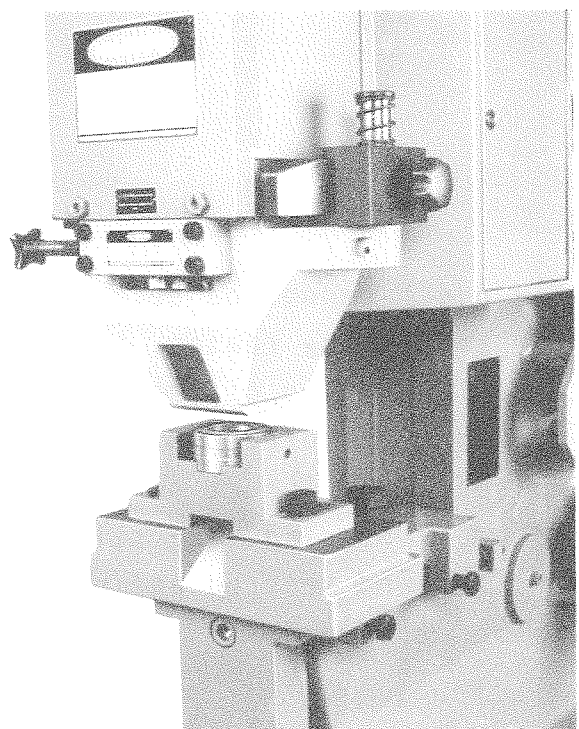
Special tool holding fixture for punches and dies with cutting diameters up to 50 mm
